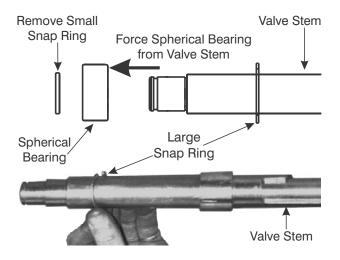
Remove Spherical Bearing and Snap Ring from Valve Stem
